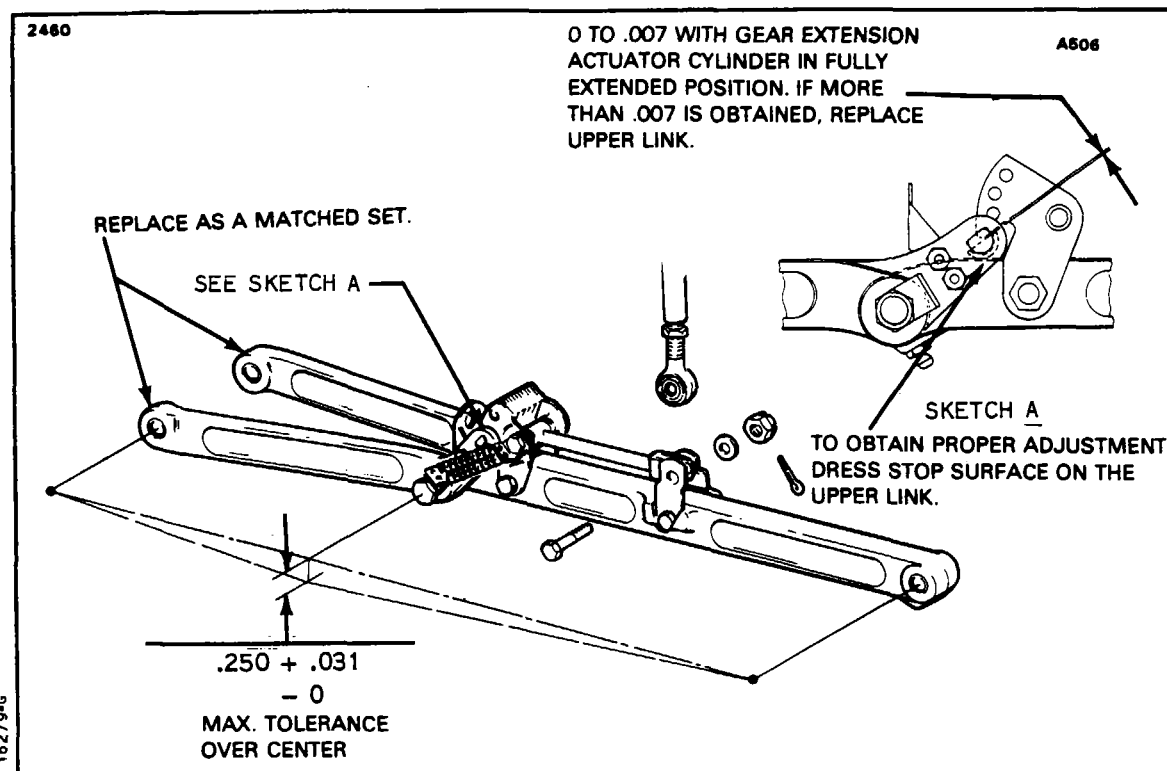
Adjustment of Nose Gear Drag Link and Latch Assembly
